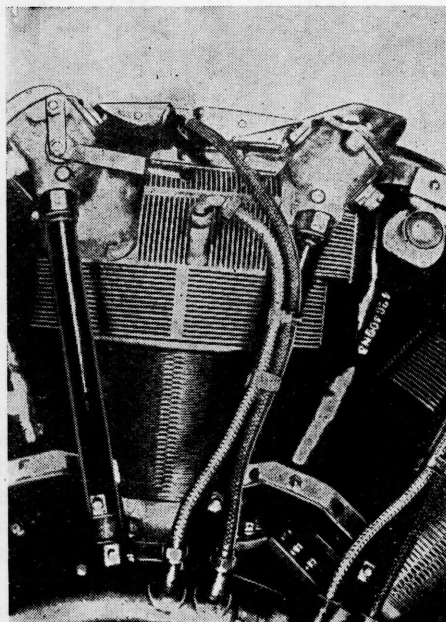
Cylinder of the Wright aircraft engine with forged cylinder head, machined fins on the head and aluminium sheet fins on the cylinder.
